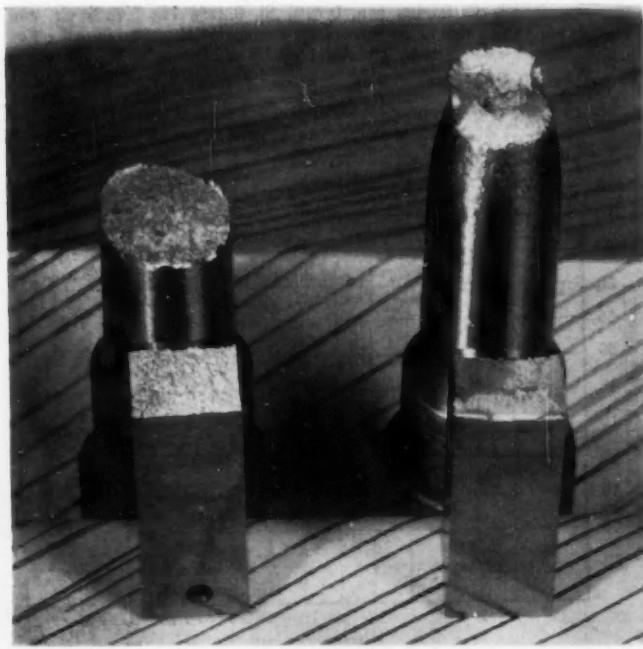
Pseudo-carburized tensile and impact specimens of AISI 80B20 steel of Republic heat 45128. Specimens at left were pseudo-carburized for 10 hr at 1700 F, cooled to 1450 F in 1½ hr, held at 1450 for 4½ hr, and oil quenched. Specimens at right were pseudo-carburized 10 hr at 1700 F, cooled to 1550 F in ¾ hr, held at 1550 F for 5½ hr, and oil quenched
